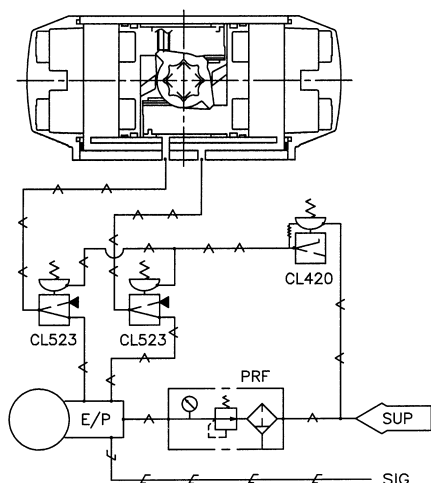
MODULATION BY POSITIONER : AIR FAILURE…………… AIR FAILURE POSITION LOCK
